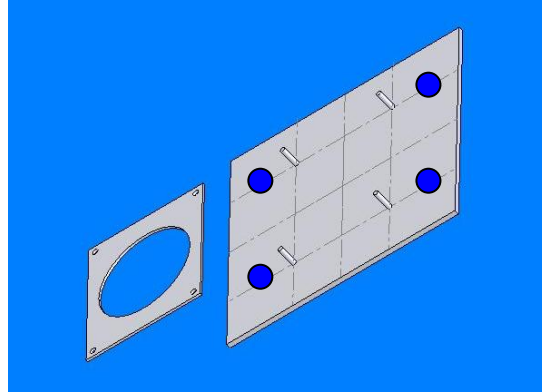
view of the fixture used to secure mould to the vibrating table
